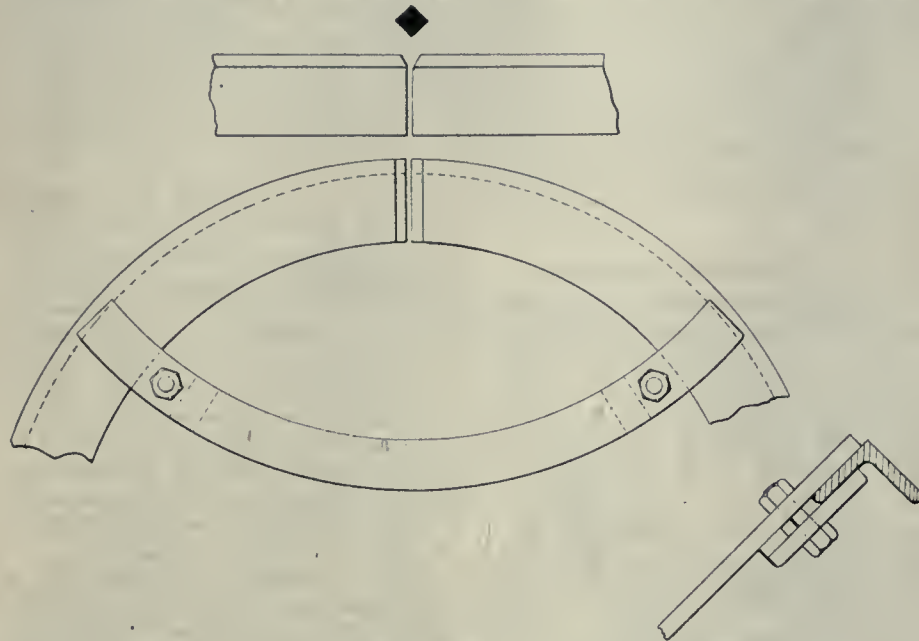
METHOD ON HOLDING A RING FOR WELDING.
